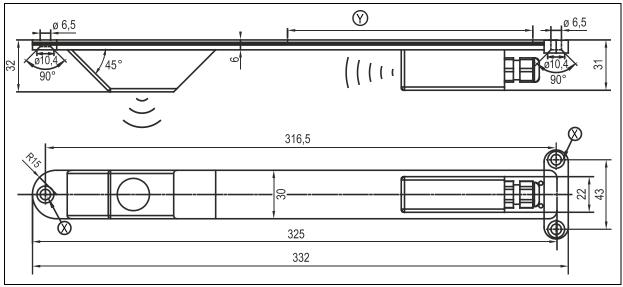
Dimensions CSMD wedge sensor V1D0
